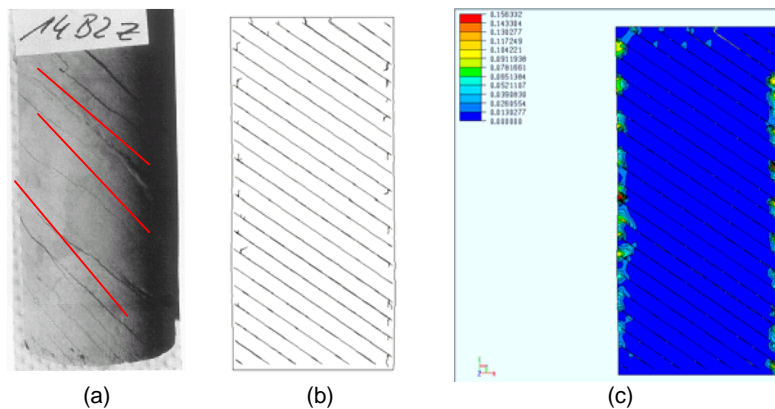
Real fracture pattern (a), simulated fracture pattern (b) and effective plastic strain (c) for the Z-sample. Red is macroscopic tensile failure that is reproduced by the fracture pattern.
